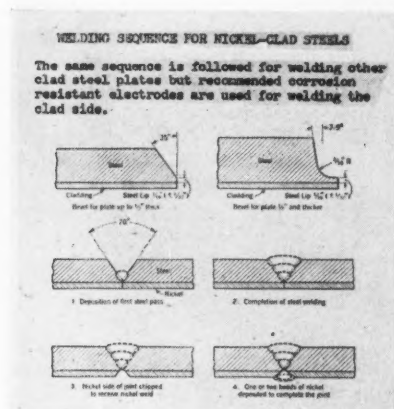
Welding sequence of clad steel for butt welding.
